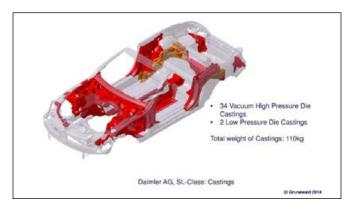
Typical BIW concept for aluminum die casting applications in the Daimler SL-class automobile, for which Grunewald supplied heat treated prototype and pre-series low pressure sand castings to specified wall thicknesses and tolerances and equivalent required mechanical properties.
